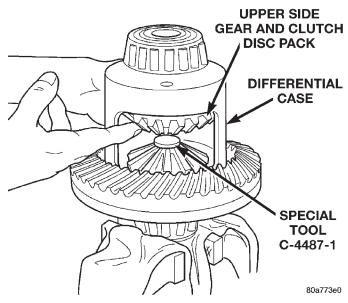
Upper Side Gear & Clutch Disc Pack Installation
